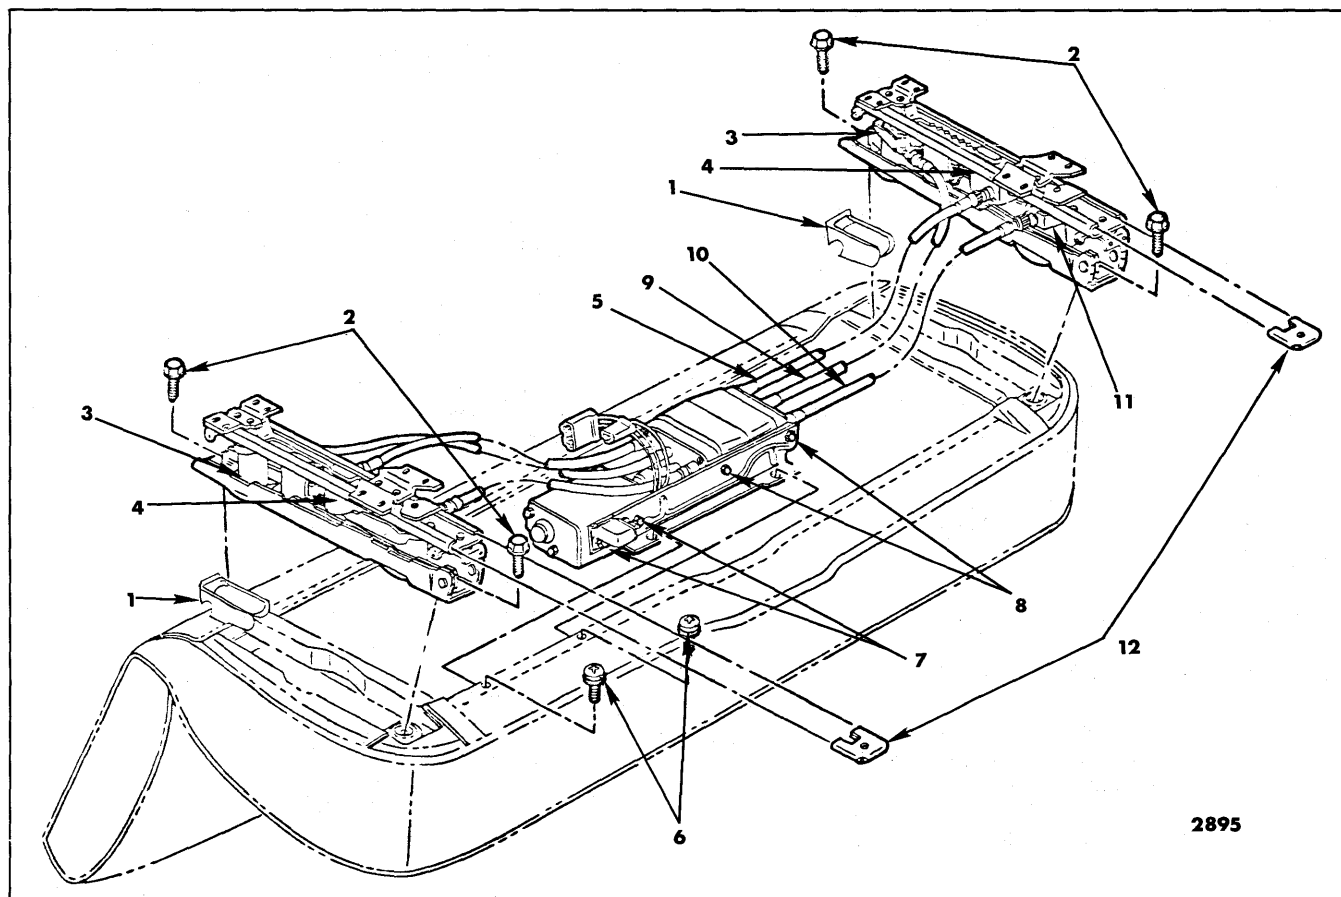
Front Seat Assembly - Six Way - "B & C" Styles
